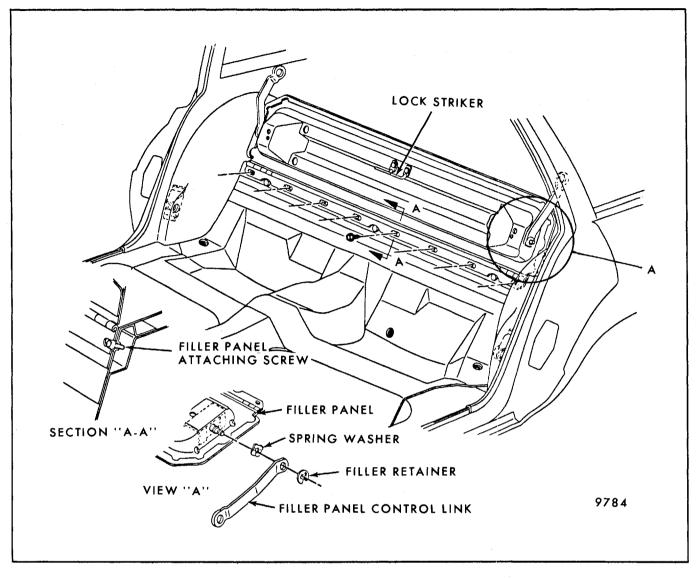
Folding Second Seat Back Filler Panel and Link Installation - A Styles
